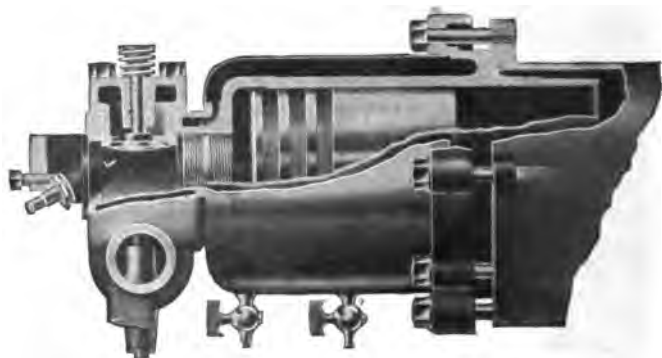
Part Section of the Cadillac Motor, showing position of valves and spark plug and the method of securing the copper jacket cover.
